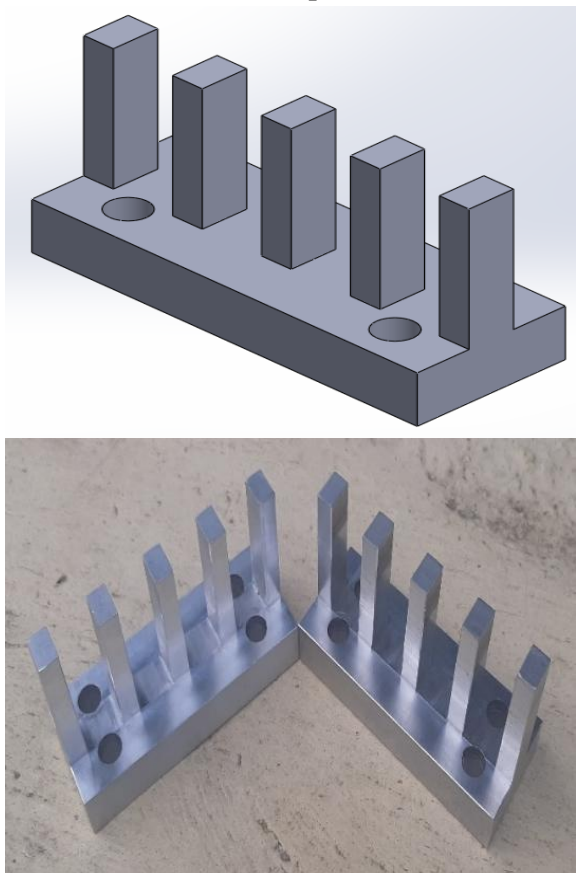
Photograph of the 42 mm depth-cut heat sink model
